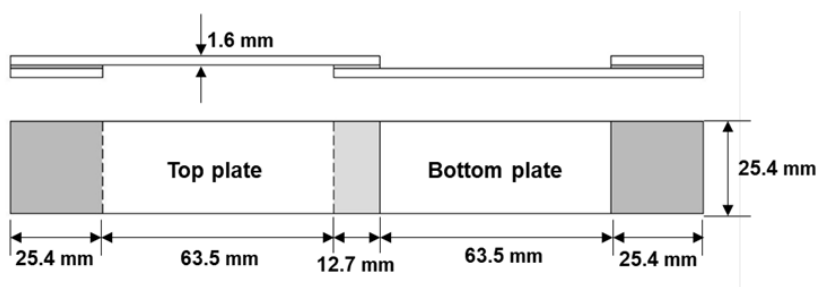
Geometry and dimensions of specimens used for lap-shear tests.
